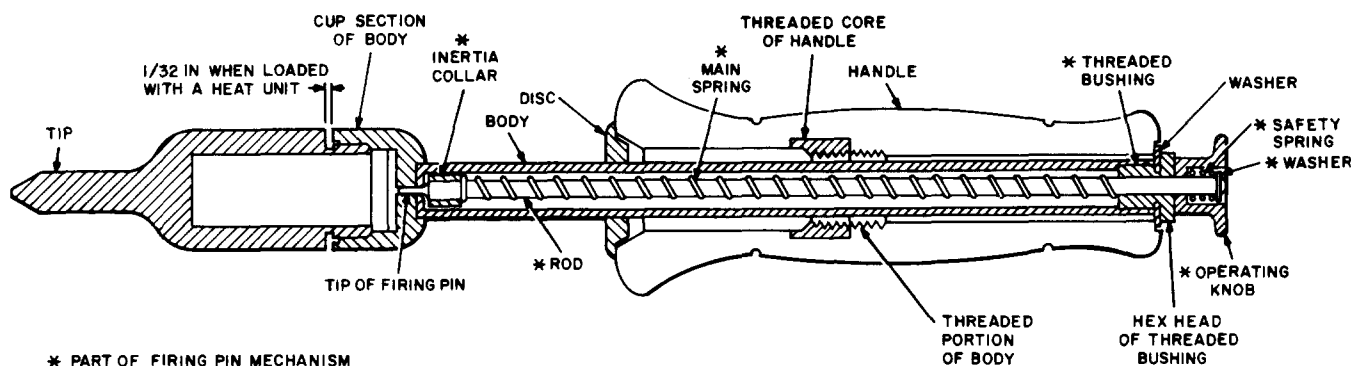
Section View of KS-14582 L2 Soldering Copper With L5 Tip
